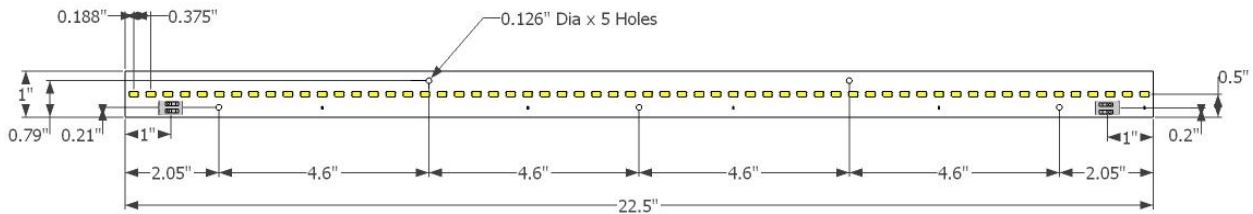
QC60SA-36V-2252 Mechanical Drawing
